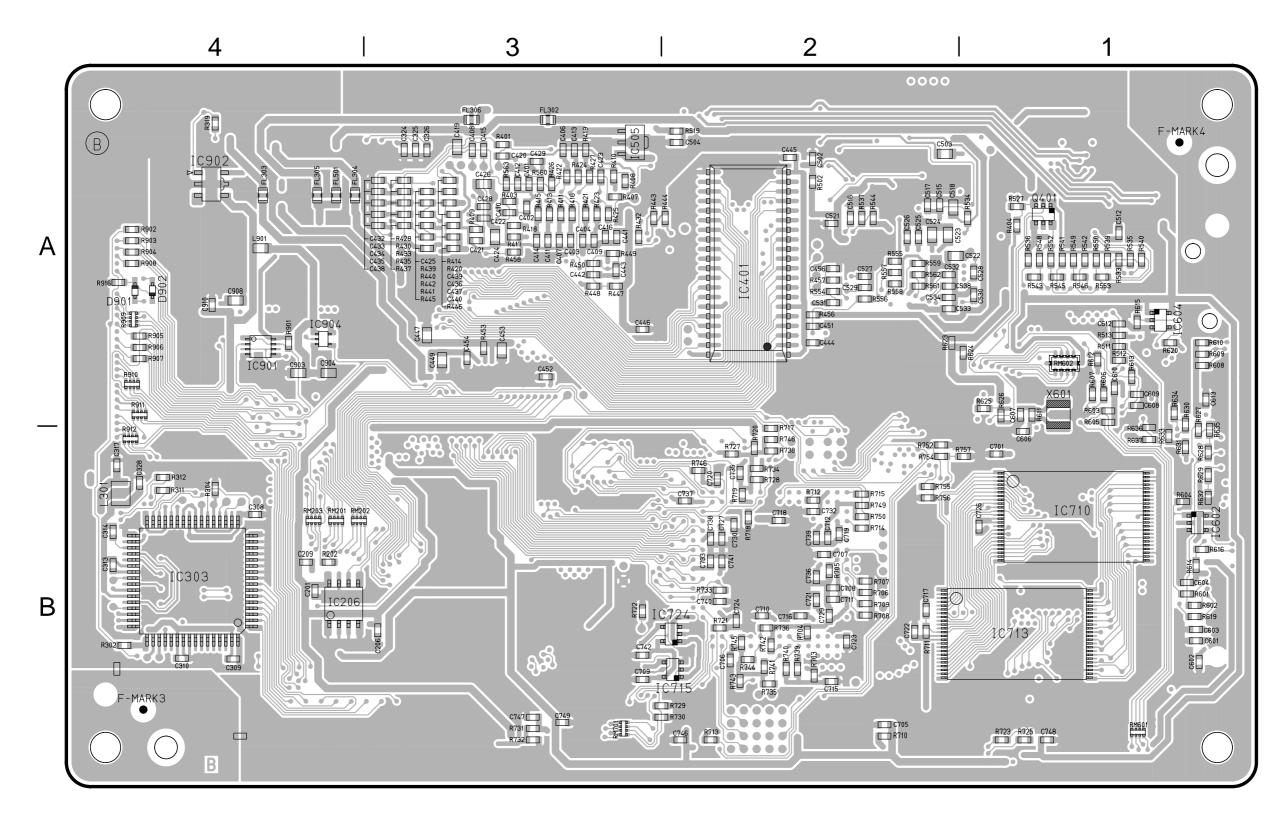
EU01 Main PC Board (Bottom pattern and bottom parts location diagram)
